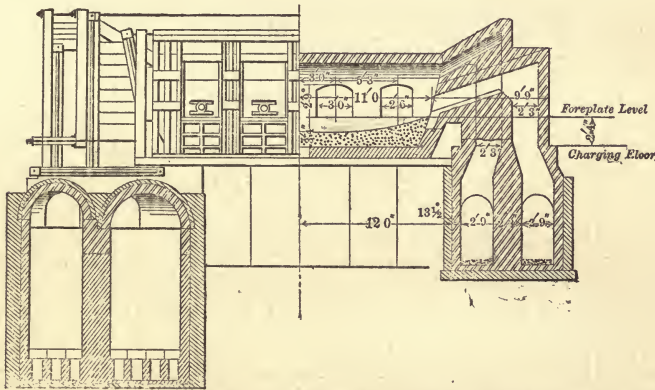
CROSS SECTION, STATIONARY TYPE OPEN-HEARTH STEEL MELTING FURNACE.
